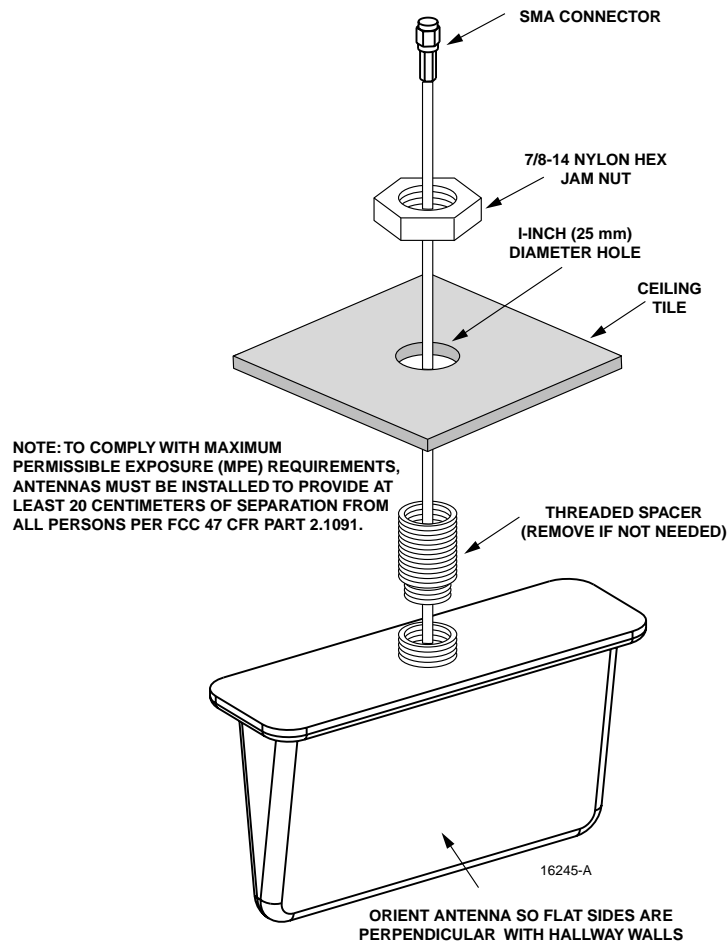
800 MHz Ceiling-Mount Hallway Antenna Installation
